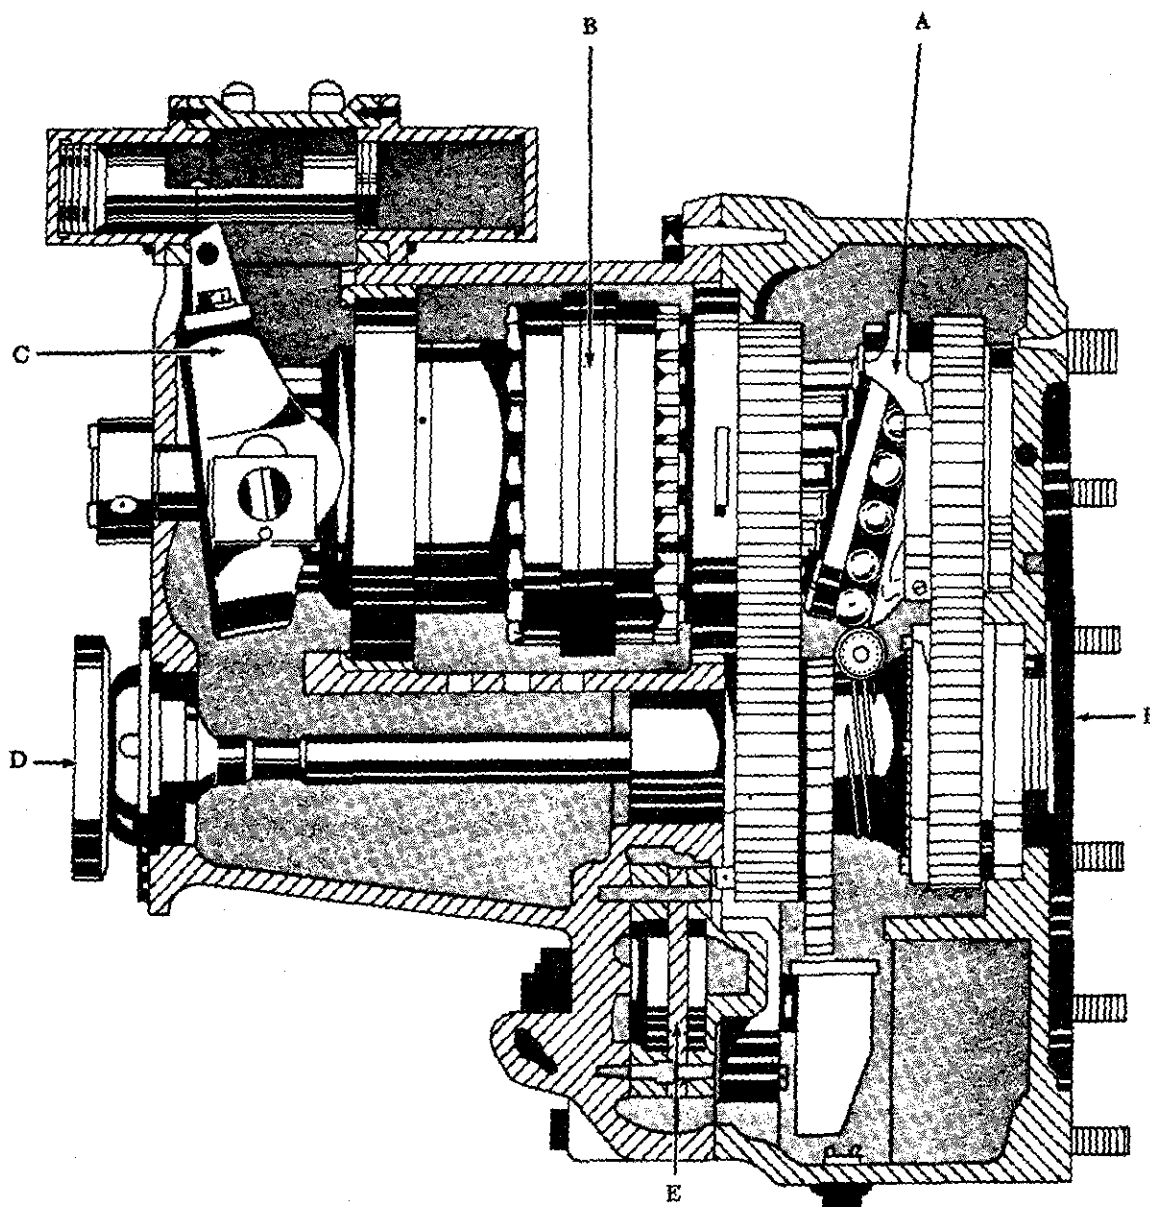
Cutaway view of a hydraulic transmission.
